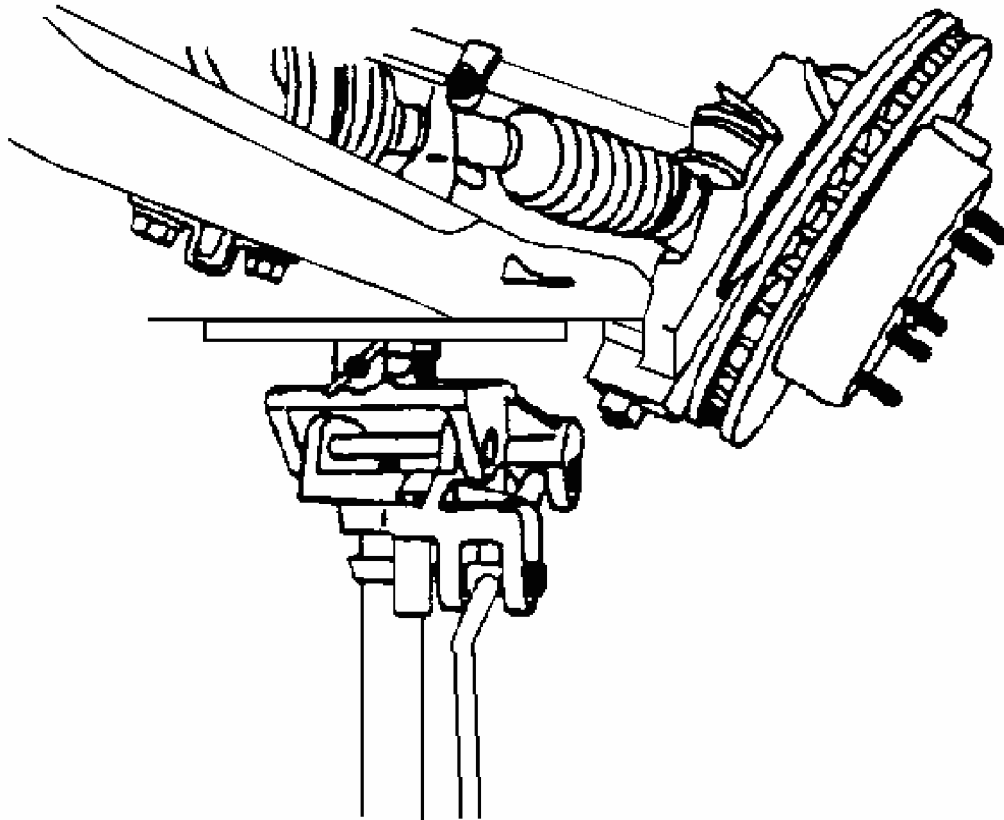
Positioning Safety Stand Under Lower Control Arm
